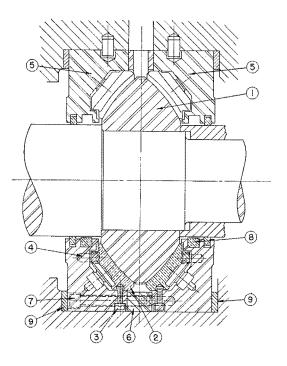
Double spherical bearing. It combines thrust and radial functions. 1, Collar. 2, Shoes. 3, Screws retaining shoes. 4, Shoe Stop Pins. 5, Base Rings. 6, Spacer Ring, 7, Bolts holding base rings together. 8, Oil baffles. 9, Filler Pieces.
